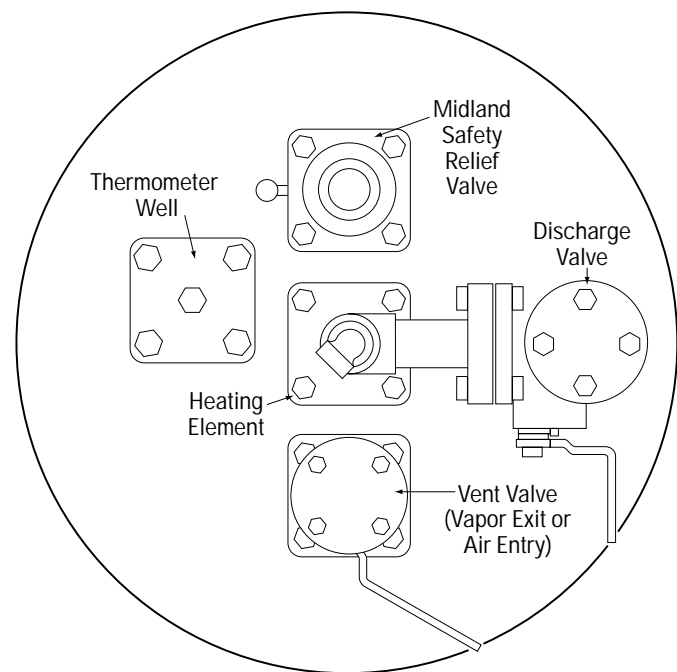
Typical SO₃ Dome Arrangement and Fittings
